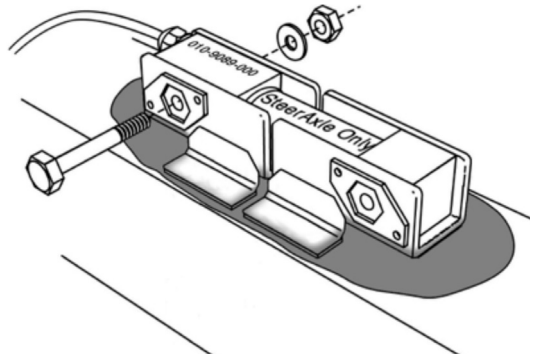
Inserting the sensor into the welded bracket.
